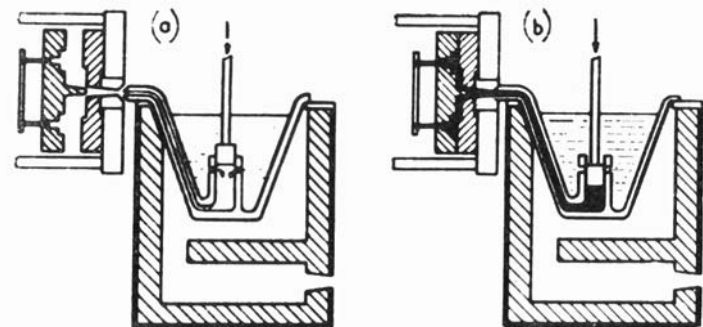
A piston-operated hot-chamber die casting machine (goose-neck machine): (a) mould open prior to metal injection; (b) piston operated to inject metal into the mould (Sharp¹³).
